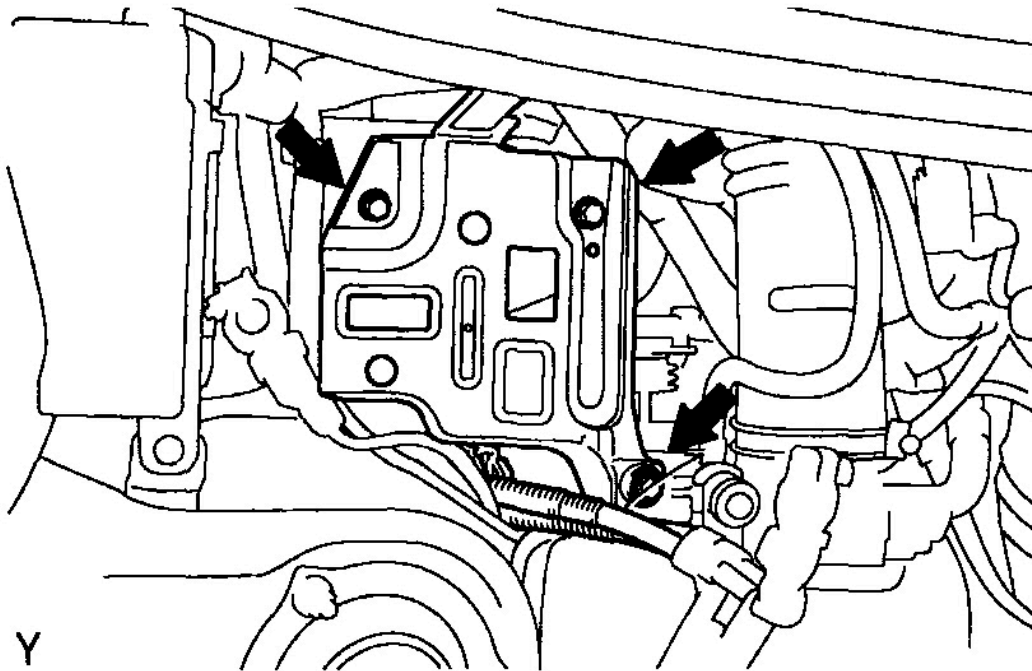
Identifying Engine Unit Components (5 Of 5)
